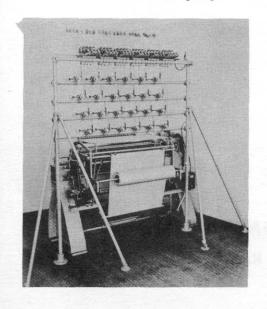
New "Insto-Start" Over-End Tension applied to No. 102 Universal Coil Winding Machine.
